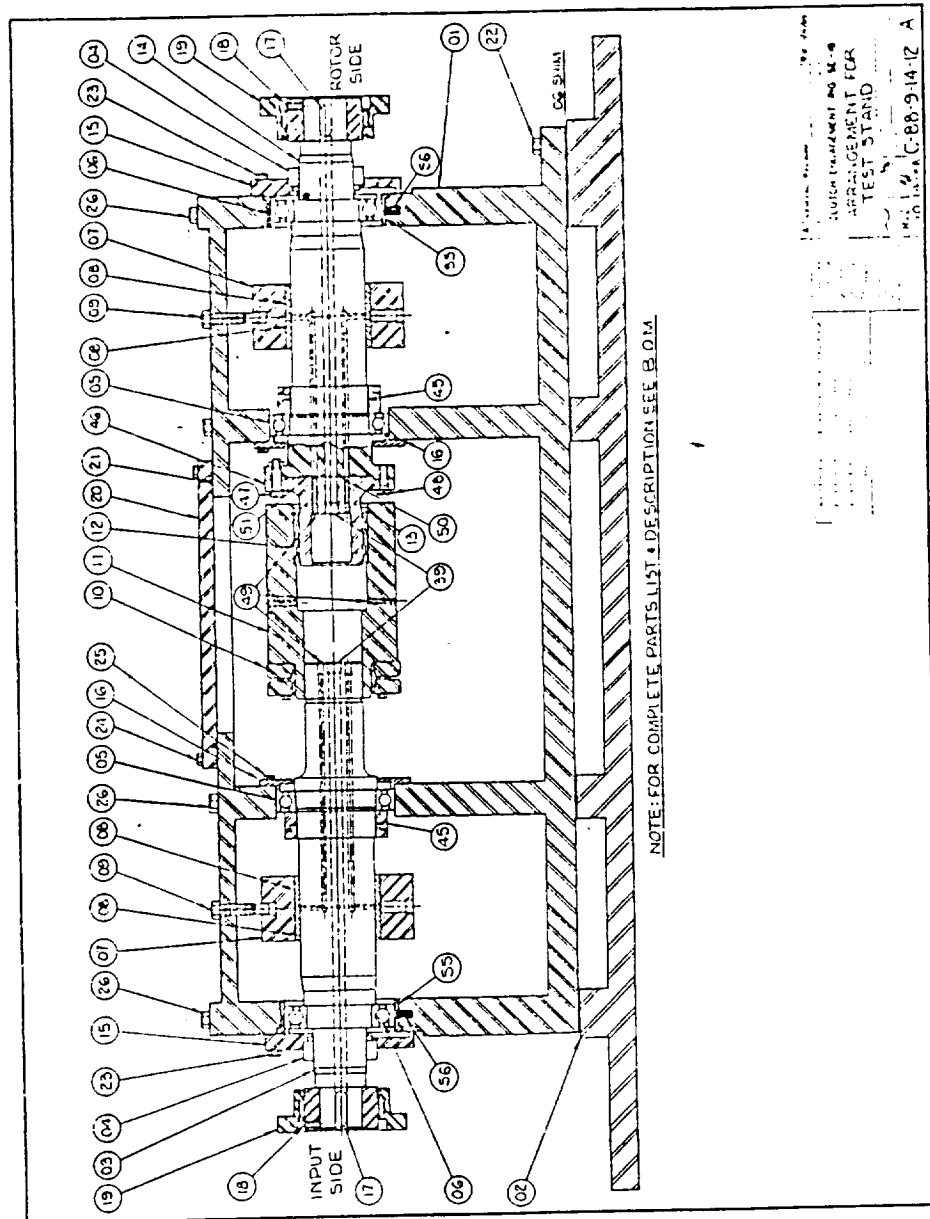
Drawing C-88-9-14-12. Arrangement for the final design of the test rig.
